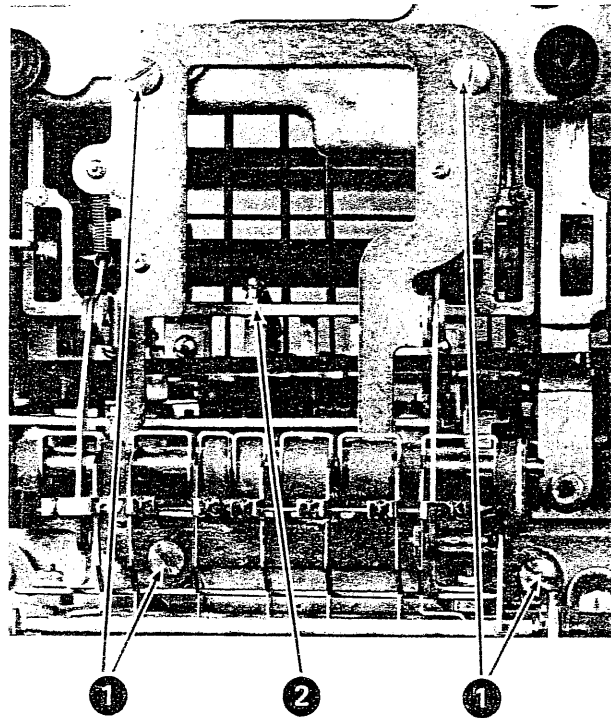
Selector-Bail Removal (Steps 2 and 3)
